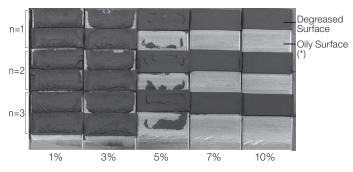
Conventional FIPG Cohesive Fracture Ratio
